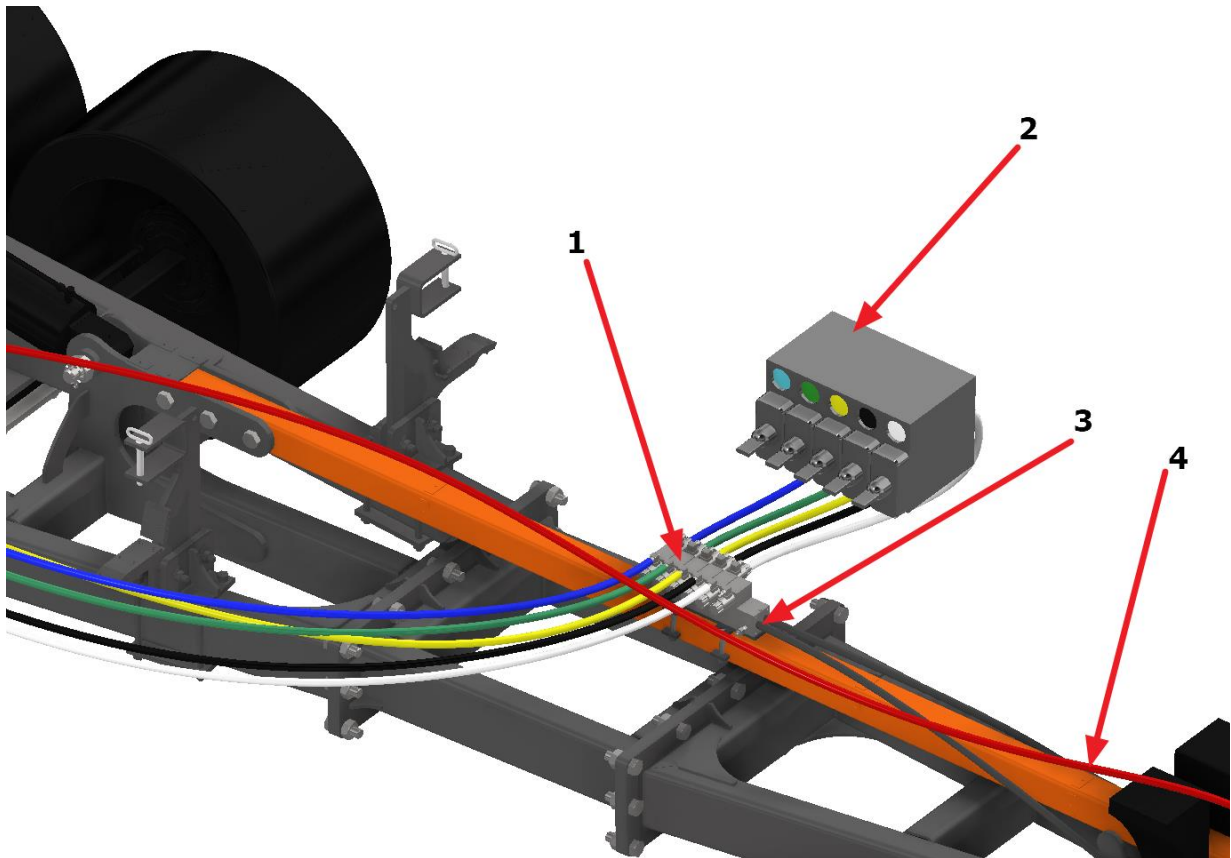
Machine chassis with valve block installed (1 - valve block with electric control, 2 - control panel with joystick, 3 - supply output of valve block, 4 - supply output of machine wing folding/unfolding hydraulics)
